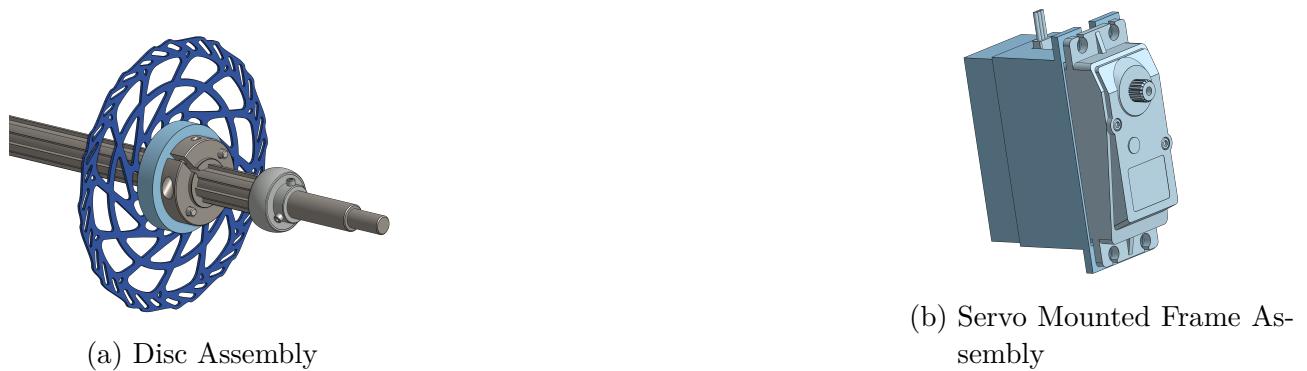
Assembly Components: Disc Assembly and Servo Mounted Frame Assembly
